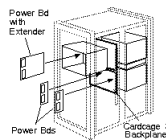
Rackmount Chassis Component - Power Boards (System Controller, 505, 512, 512S)
